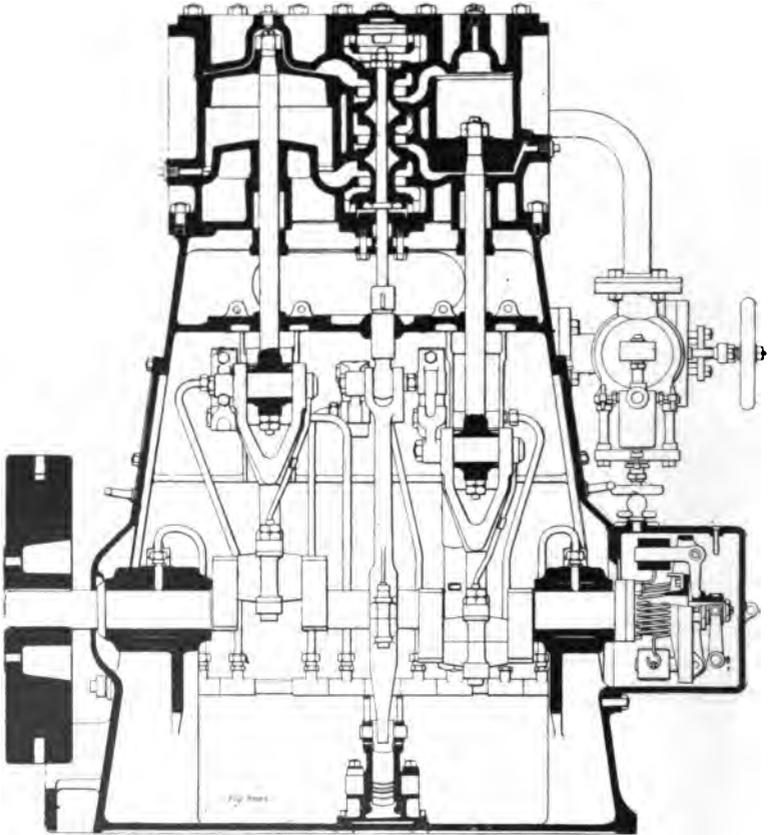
SECTIONAL ELEVATION OF "ERITH" COMPOUND ENGINE.
